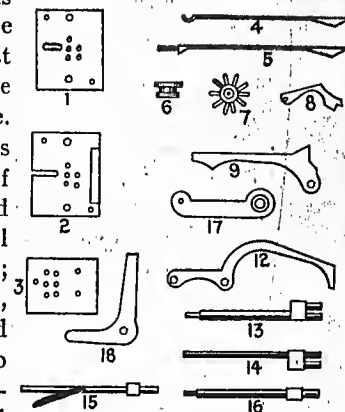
Parts of the mallet perforator. 1, Front puncher plate; 2, back puncher plate; 3, back guide to punchers; 4, back spring acting on star wheel click lever; 5, vertical spring on which guide roller is pivoted; 6, guide roller; 7, star wheel; 8, star wheel click; 9, star wheel click lever; 10, lever regulating play of star wheel click lever; 11, center punch (for dot, dash and space); 12, top punch (for dot and dash); 13, bottom punch (2, 1 for dot 1 for dash); 14, center punch (for dash); 15, socket lever; 16, adjusting lever.
